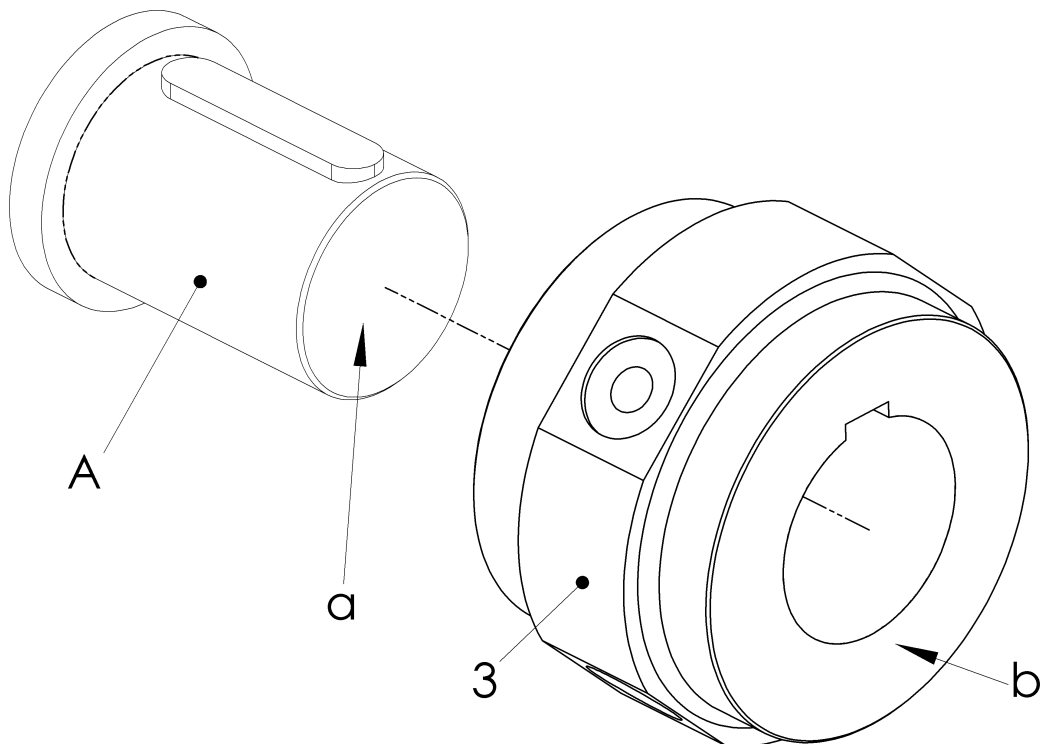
Mounting the hub with cylindrical bore and keyway
